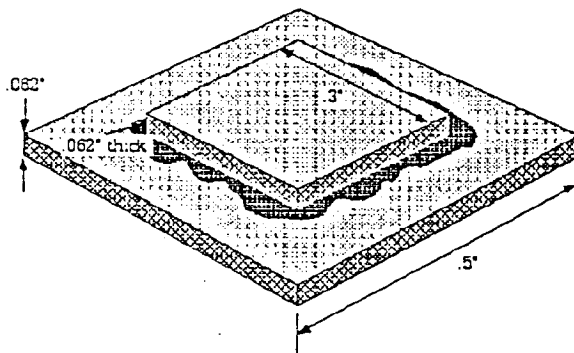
Outline drawing of a remelt temperature specimen. Base and top are 1.6 mm (1/16") aluminum plated with the appropriate metal and attached with solder.
